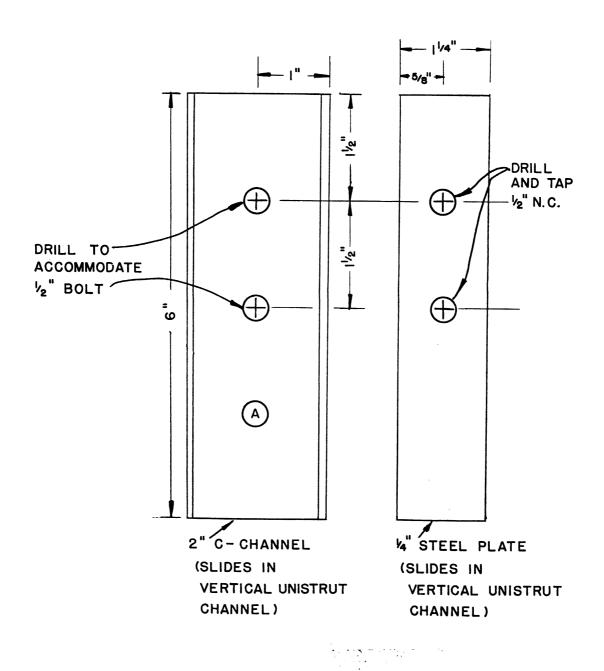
Components of Support Bracket (Part A and Backing Plate)
